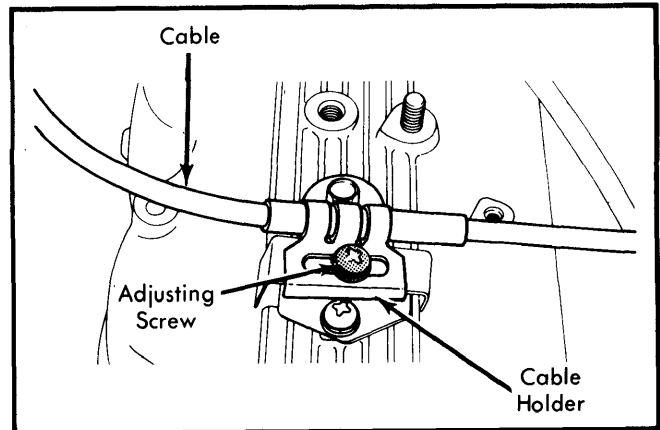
Adjusting Accelerator Cable Free Play (D50 & Arrow Pickup)
